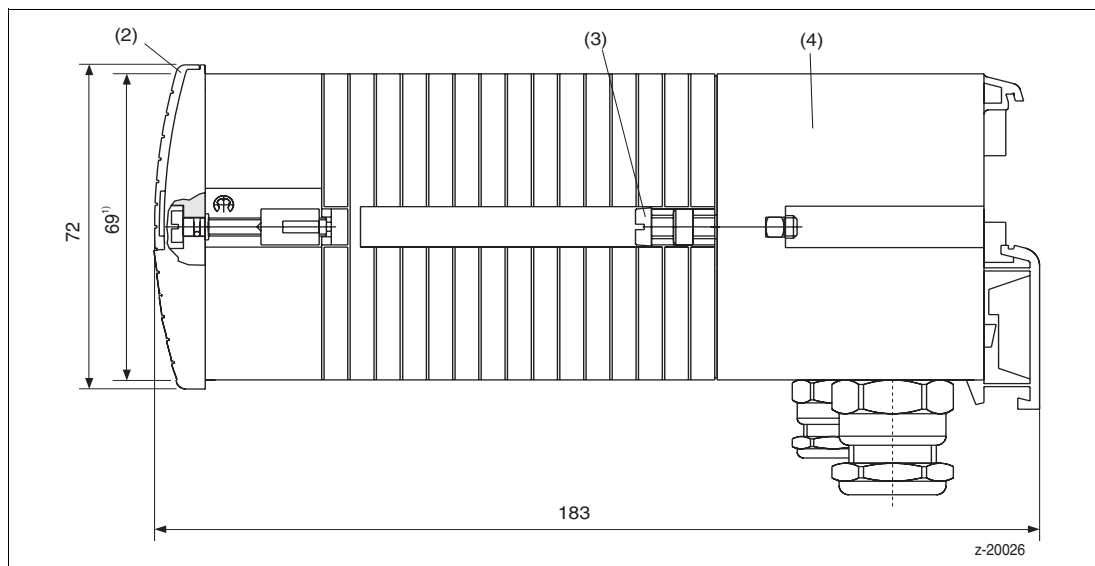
Dimensional drawing, side view, rear housing (all dimensions in mm)
